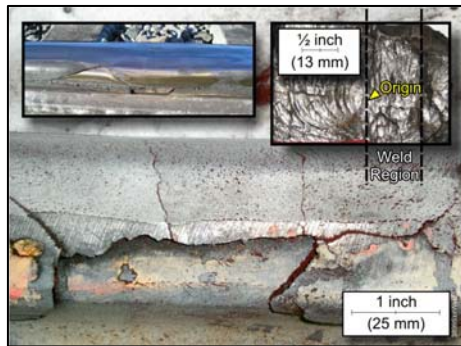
Slot Weld Horizontal Fracture in the Railhead.
